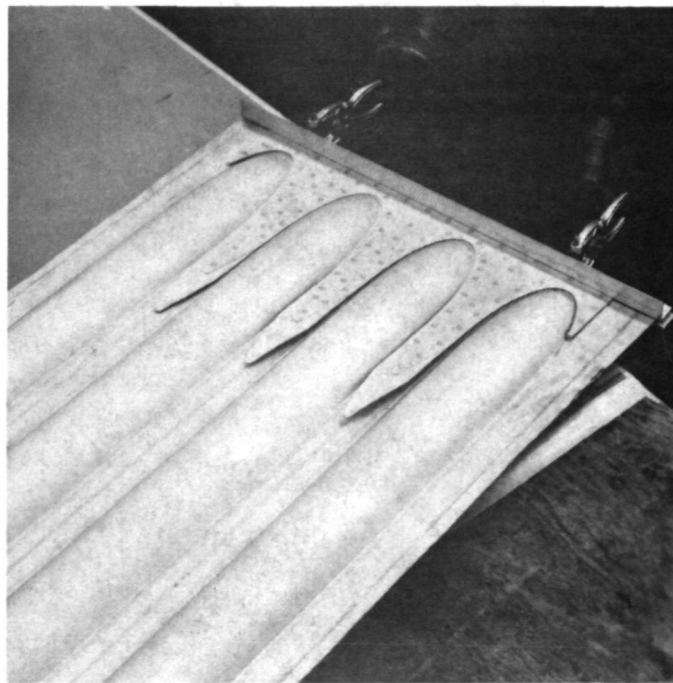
DOUBLER AND PANEL SUBASSEMBLIES CLAMPED PRIOR TO FINAL ASSEMBLY
